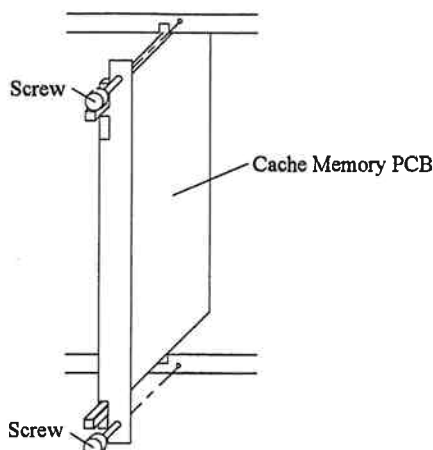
Removal of the Cache Memory PCB
